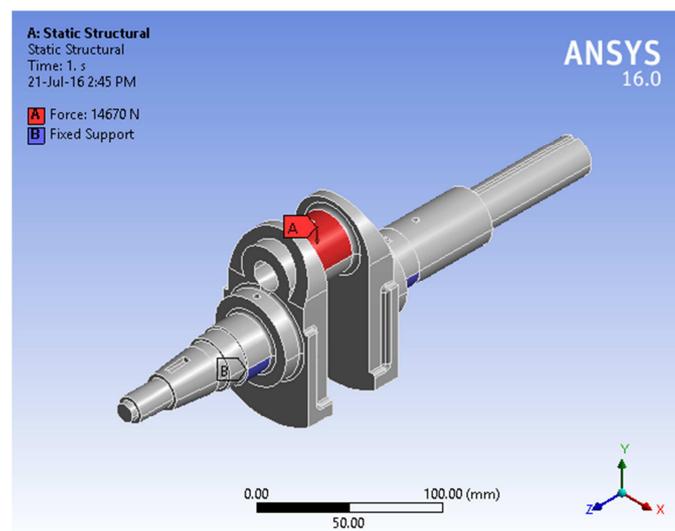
Input data and boundary condition for single cylinder engine crankshaft.
